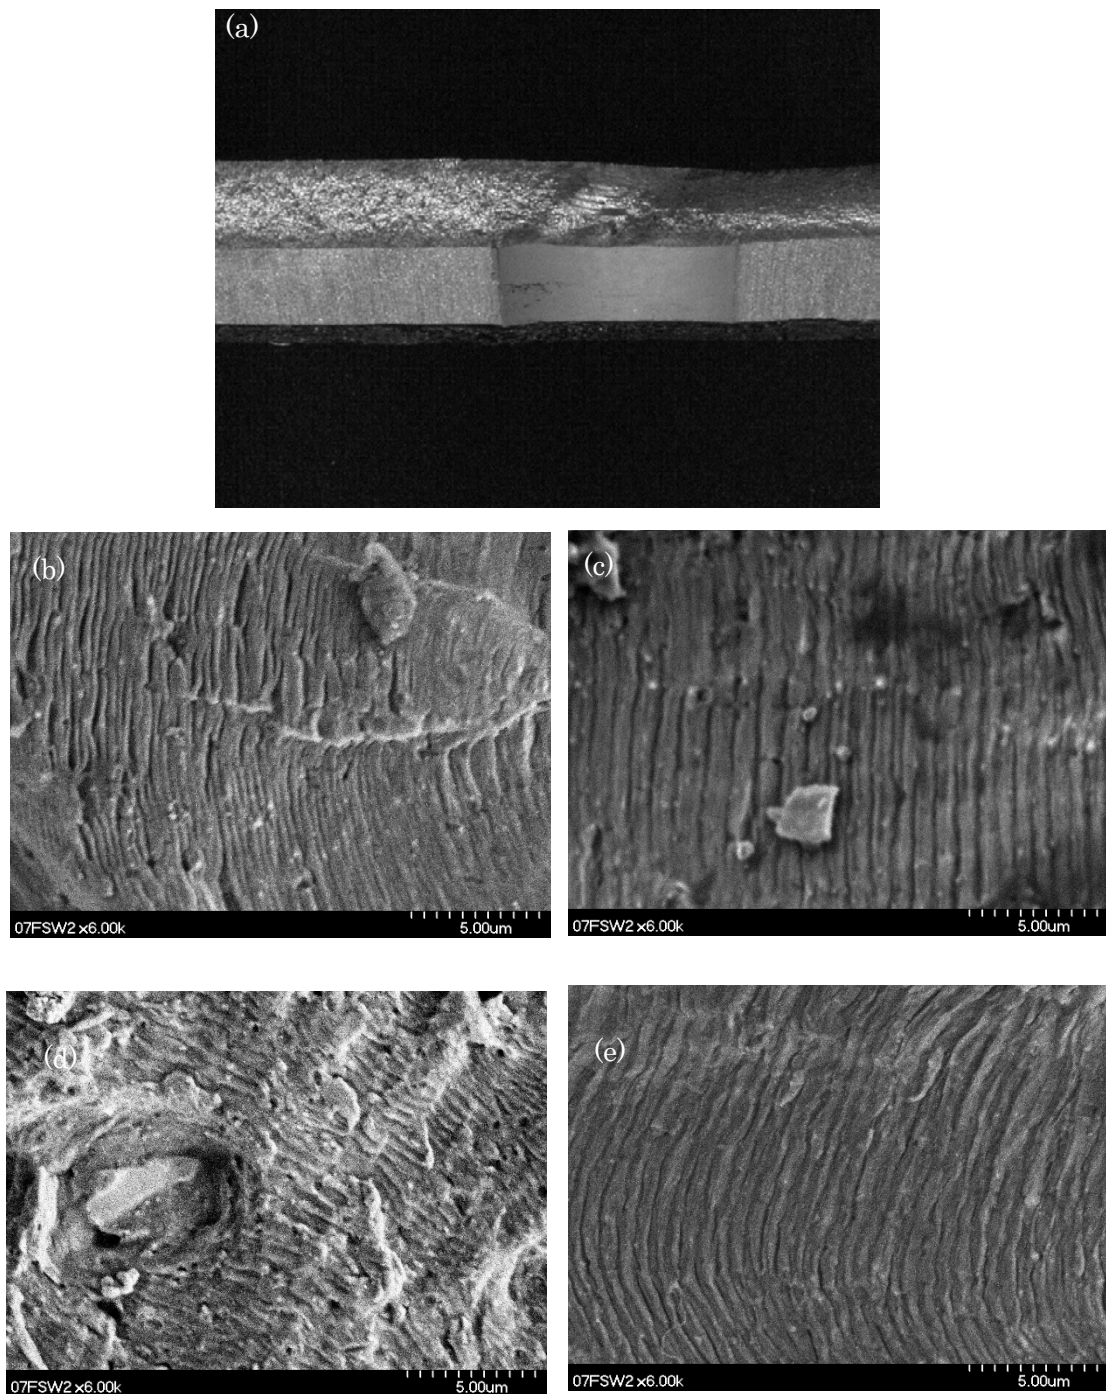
Fracture surface observation of FSW joint ( $R=0.1$ ,  $L=40$ ) (a) Fracture surface, (b) BM, (c) HAZ, (d) SZ, (e) HAZ
